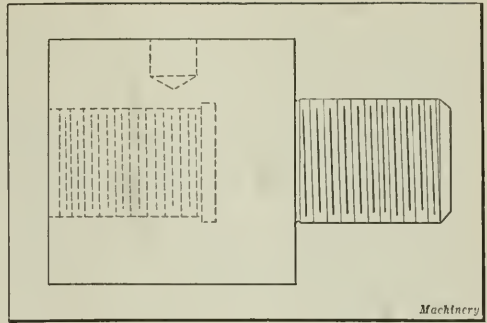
Adapter which enables a Standard Chuck to be used on any Spinning Lathe
